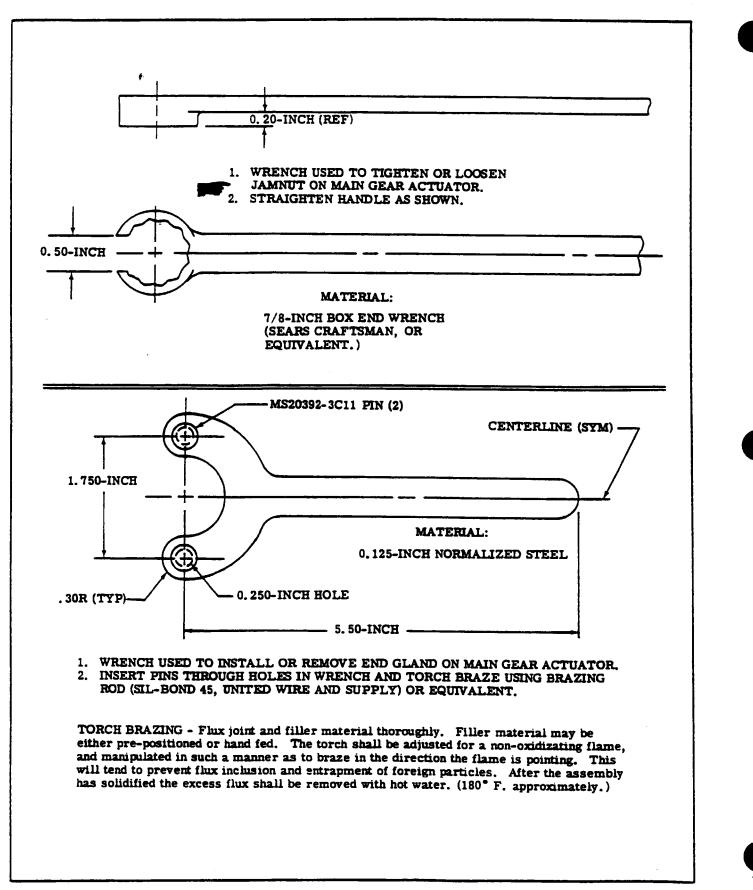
Fabrication of Main Landing Gear Actuator End Gland Removal Tool
